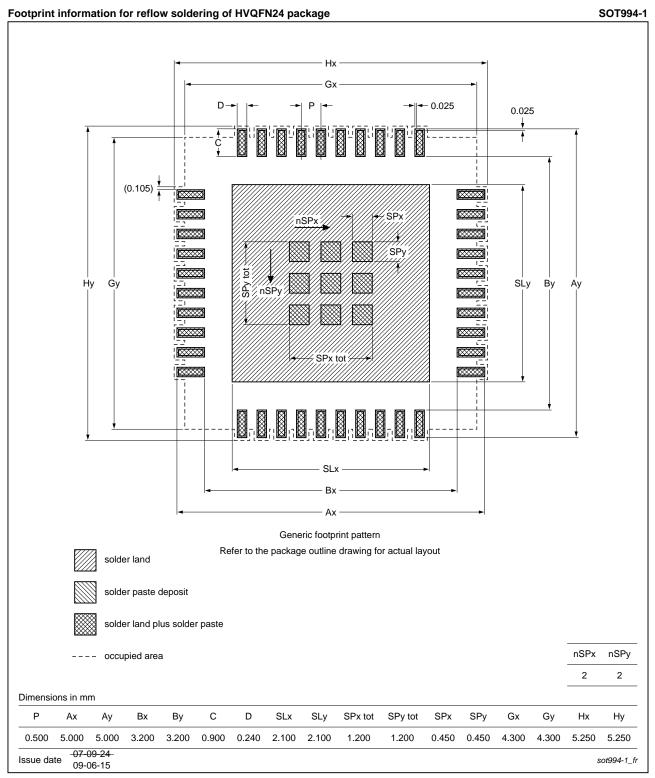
PCB footprint for SOT994-1 (HWQFN24); reflow soldering
